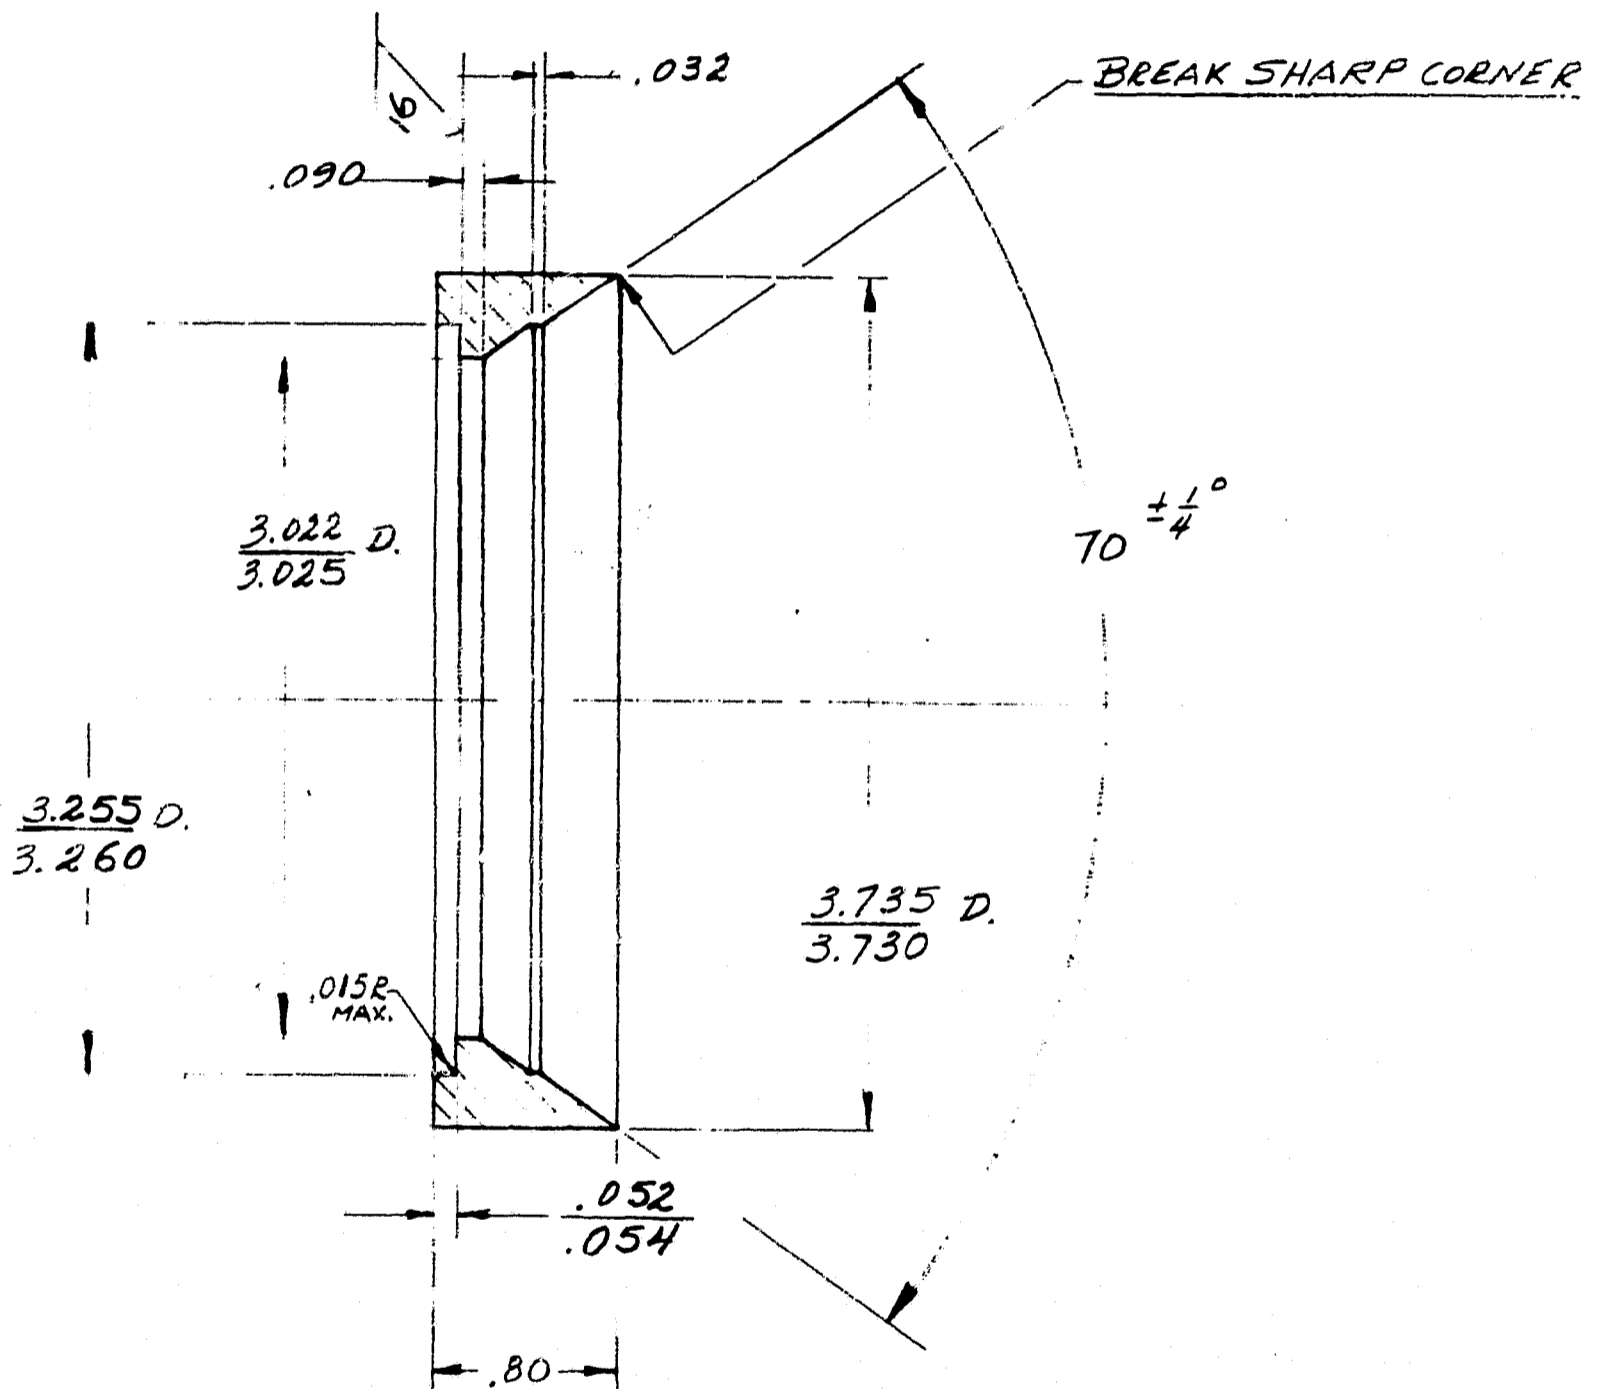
Female Adapter, Reed Seal - Three-Inch Rod - Material, 17-4 PH CRS
